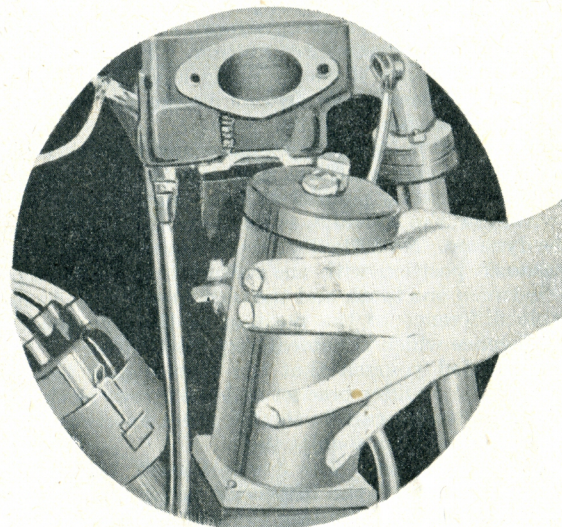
SHOWING HOW THE DYNAMO SHOULD BE REMOVED OR REPLACED
